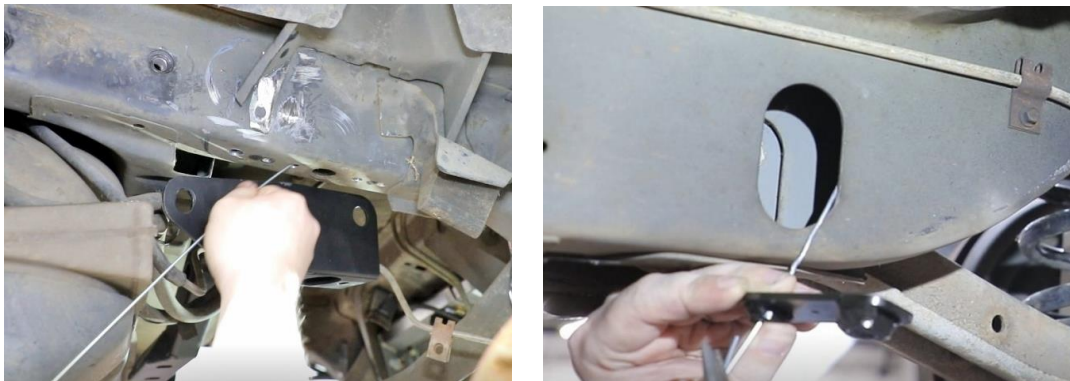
Position Single & Double Weld Nut Plates
